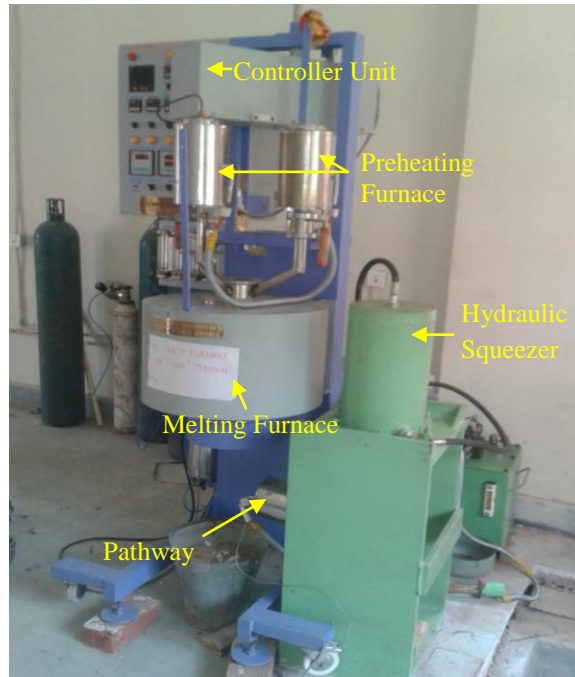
Bottom pouring stir casting furnace with squeeze casting facility
